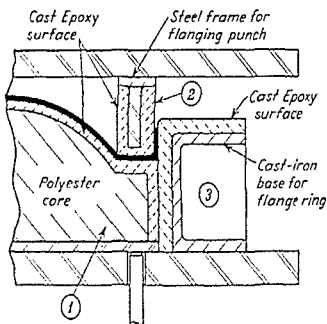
Cross section of a flanging die with plastic working surfaces. (Kieh Industries.)
